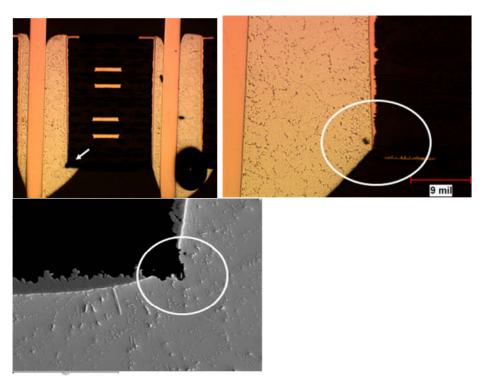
Examples of Copper Dissolution Provided by Dr. Polina Snugovsky, Celestica; SAC405 plated through hole solder joint
